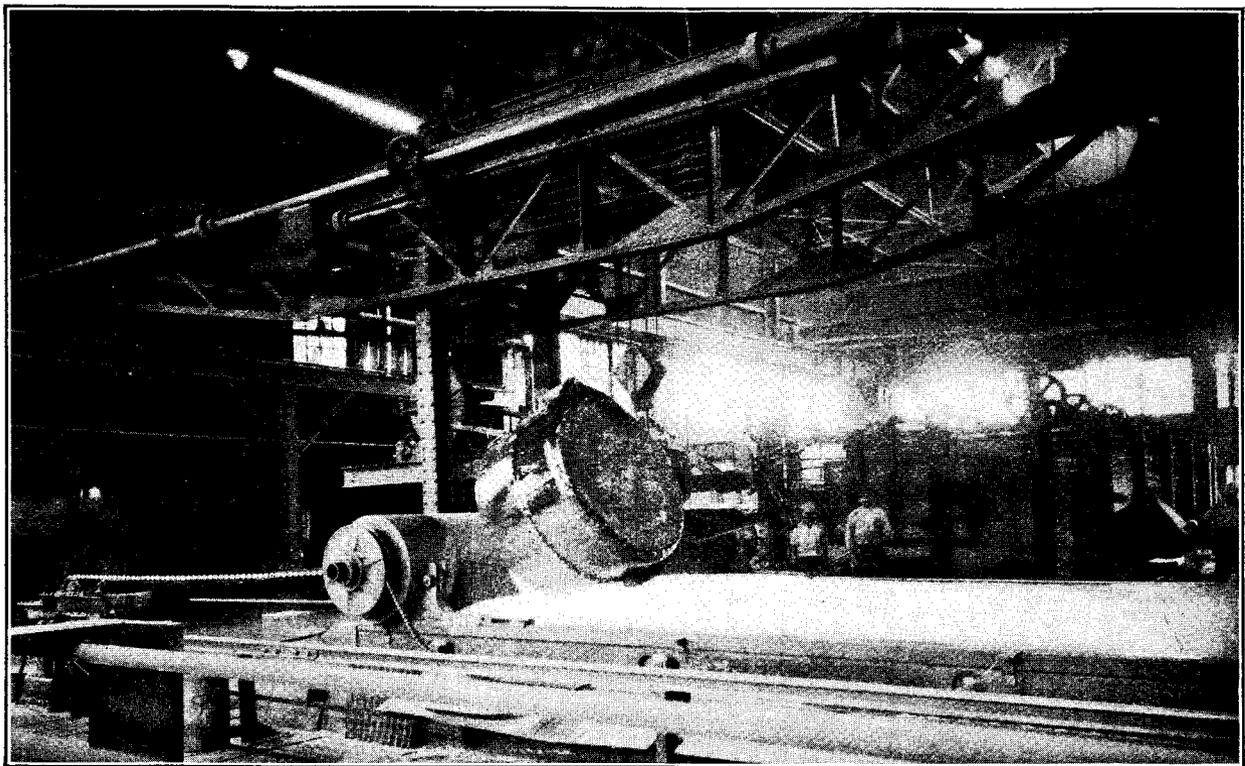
DISCONTINUOUS PROCESS: CASTING ROUGH PLATE GLASS
